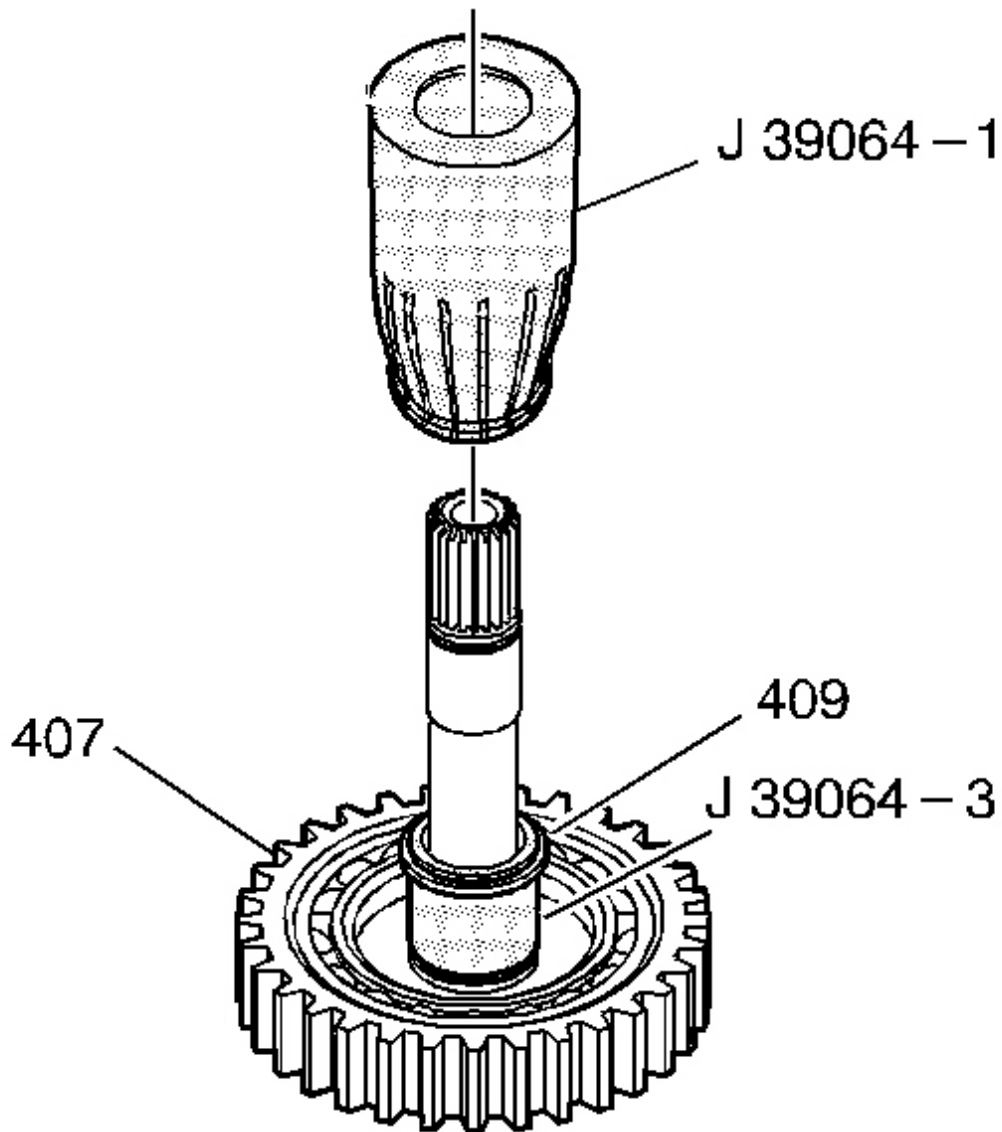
Installing Drive Sprocket Oil Seal Ring With J 39064-3
